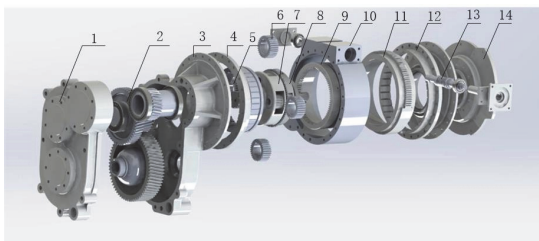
Schematic diagram of the wet-type two-speed dual-brake transmission model (1 - reducer housing, 2 - reducer, 3 - gearbox, 4 - guide rail 1, 5 - sun gear of first stage planetary gear set, 6 - planet gears of first stage planetary gear set, 7 - carrier of second stage planetary gear set, 8 - friction plates, 9 - ring of second stage planetary gear set, 10 - transmission housing, 11 - worm gear, 12 - guide rail 2, 13 - worm, 14 - motor connection flange)
